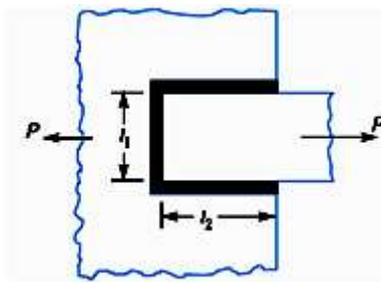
Combination of Transverse & Parallel Fillet Weld
